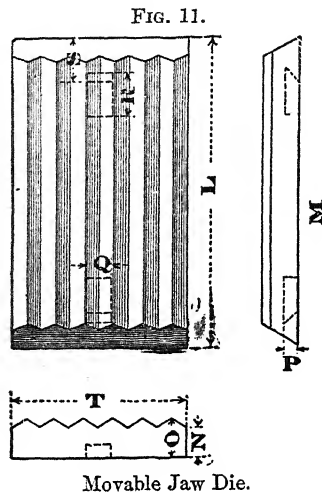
shows the form of hardened jaw-plate, or die, for the oscillating jaw, as manufactured by the Allis-Chalmers Co.
